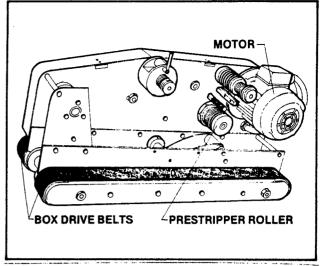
UPPER TAPING HEAD DRIVE COMPONENTS
